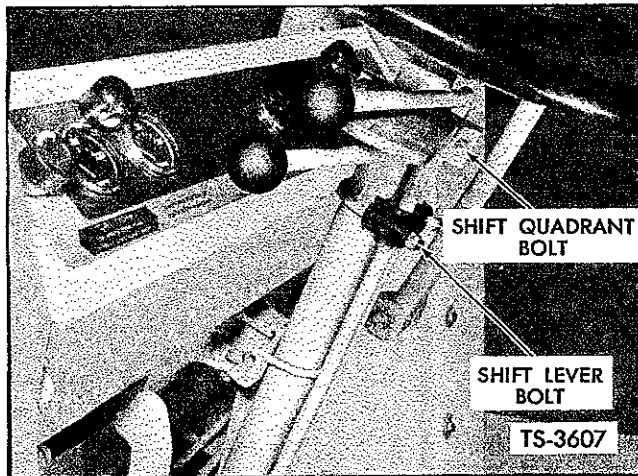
Tighten Shift Quadrant and Shift Lever Mounting Bolts
